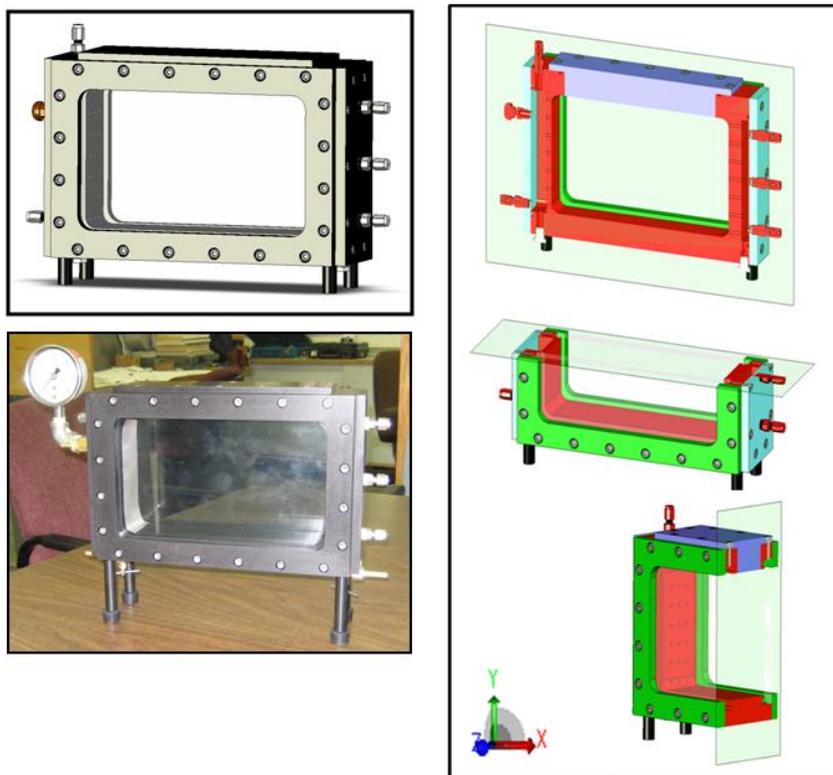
Photograph and schematic drawings of 2-D Tank with cross-sections.
